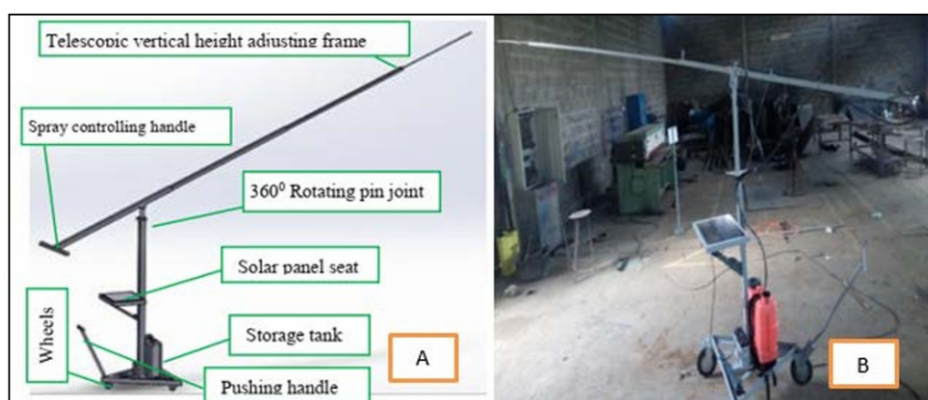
A-3D frame design; B - fully Assembled prototype of solar-powered sprayers
